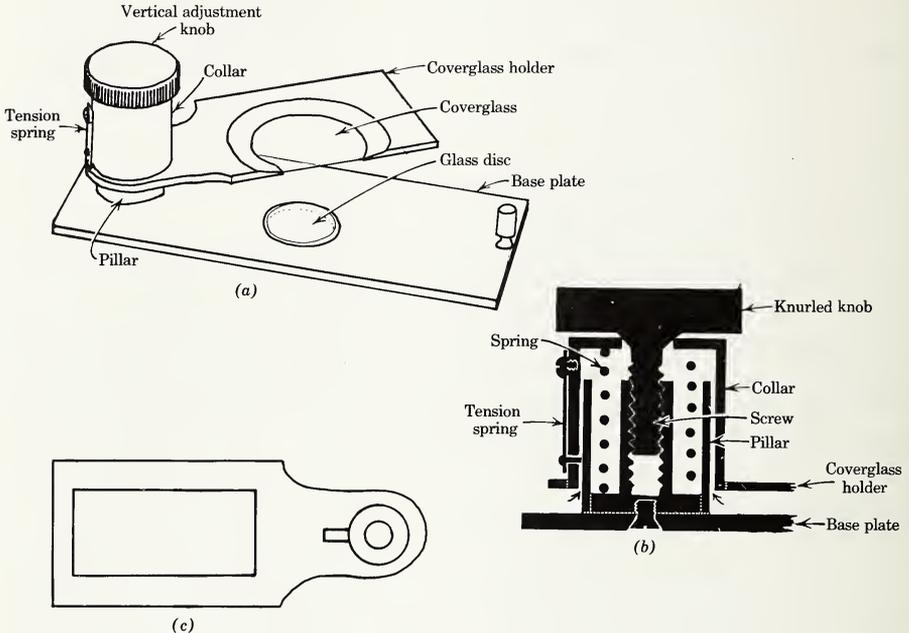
Compressor of the type formerly made by Watson & Sons. (a) General view. In use the adjustment knob would be to the right for a right-handed person. (b) Vertical section of adjustment mechanism. (c) Suggested improved form of coverglass holder.
